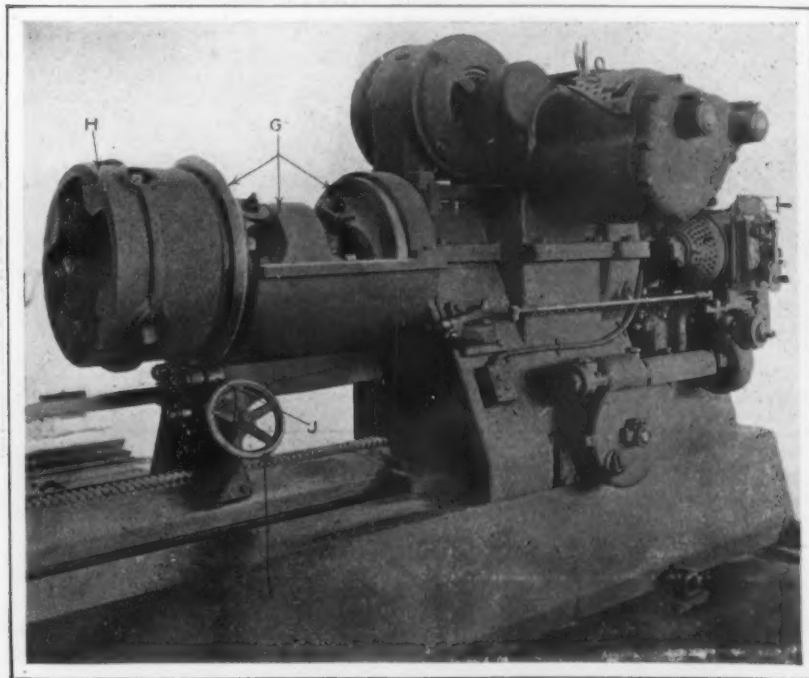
The Headstock with Its Universal Joint Locator and Driving Sleeve
